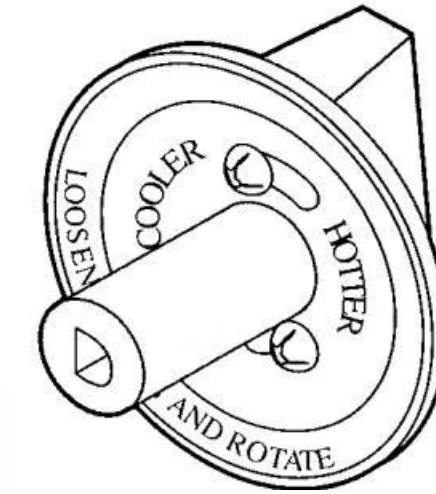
Oven temperature setting knob adjustment showing the adjustment mechanism
